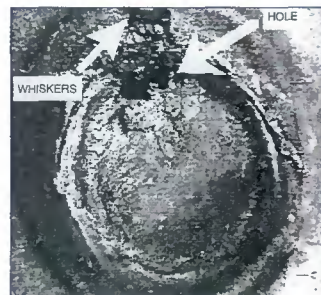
Holes and whiskers on a weld surface.
